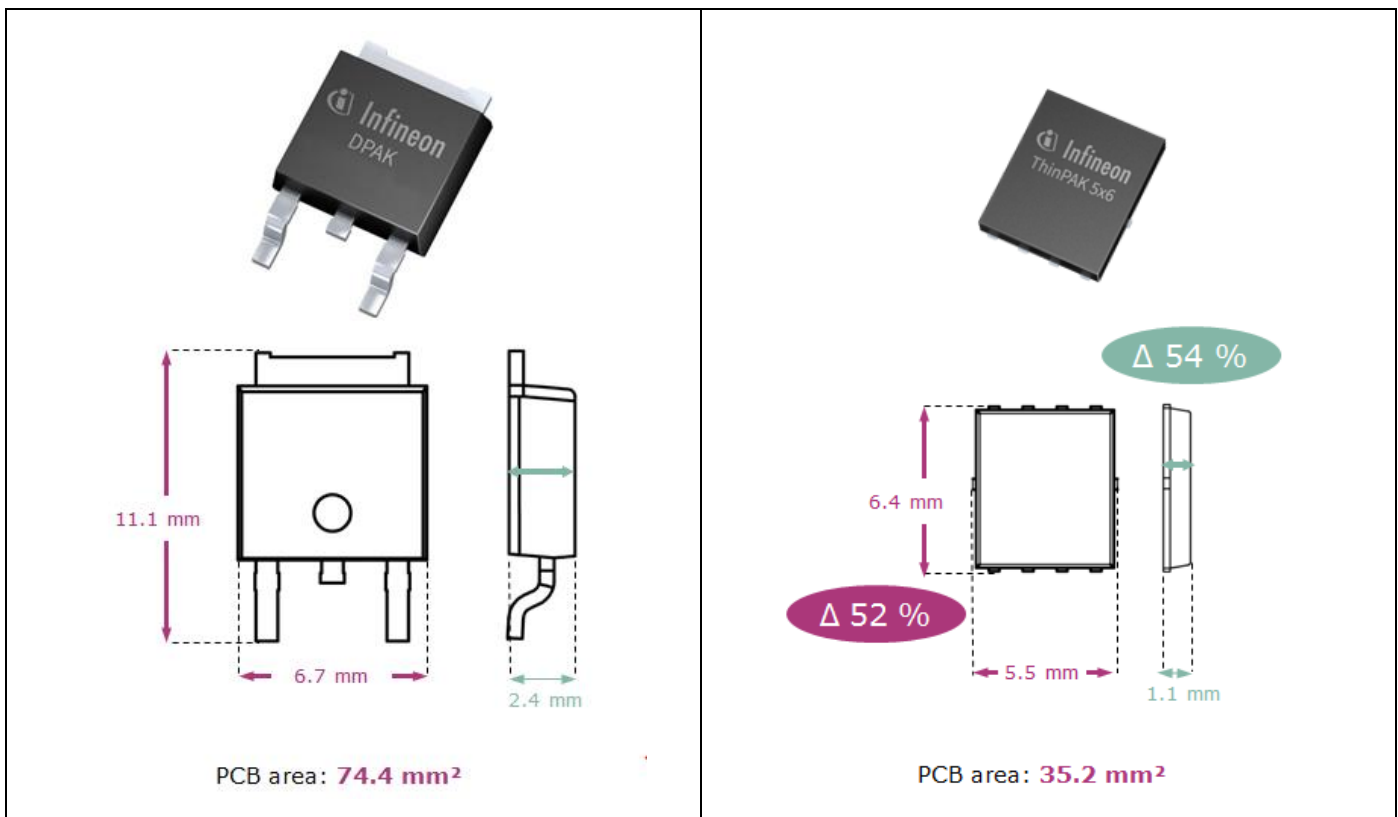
Package comparison of DPAK (74.4 mm² PCB area) and ThinPAK 5x6 (35.2 mm²)
